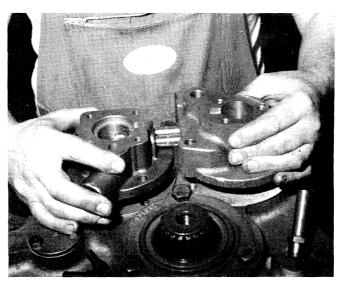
Removing or Installing Pump Mount and Valve Body together.
